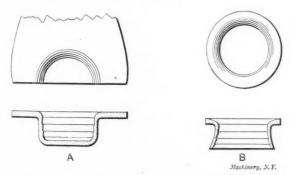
Sectional View of Drawn Rivet Shell, showing marks left by Stepped Punch
